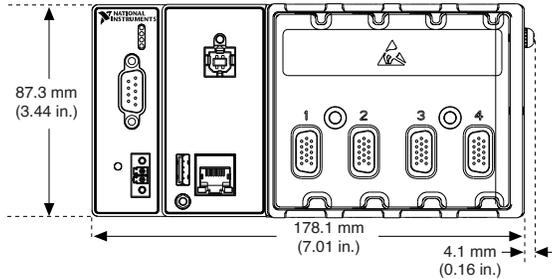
cRIO-9066/9067 Front Dimensions, Typical
